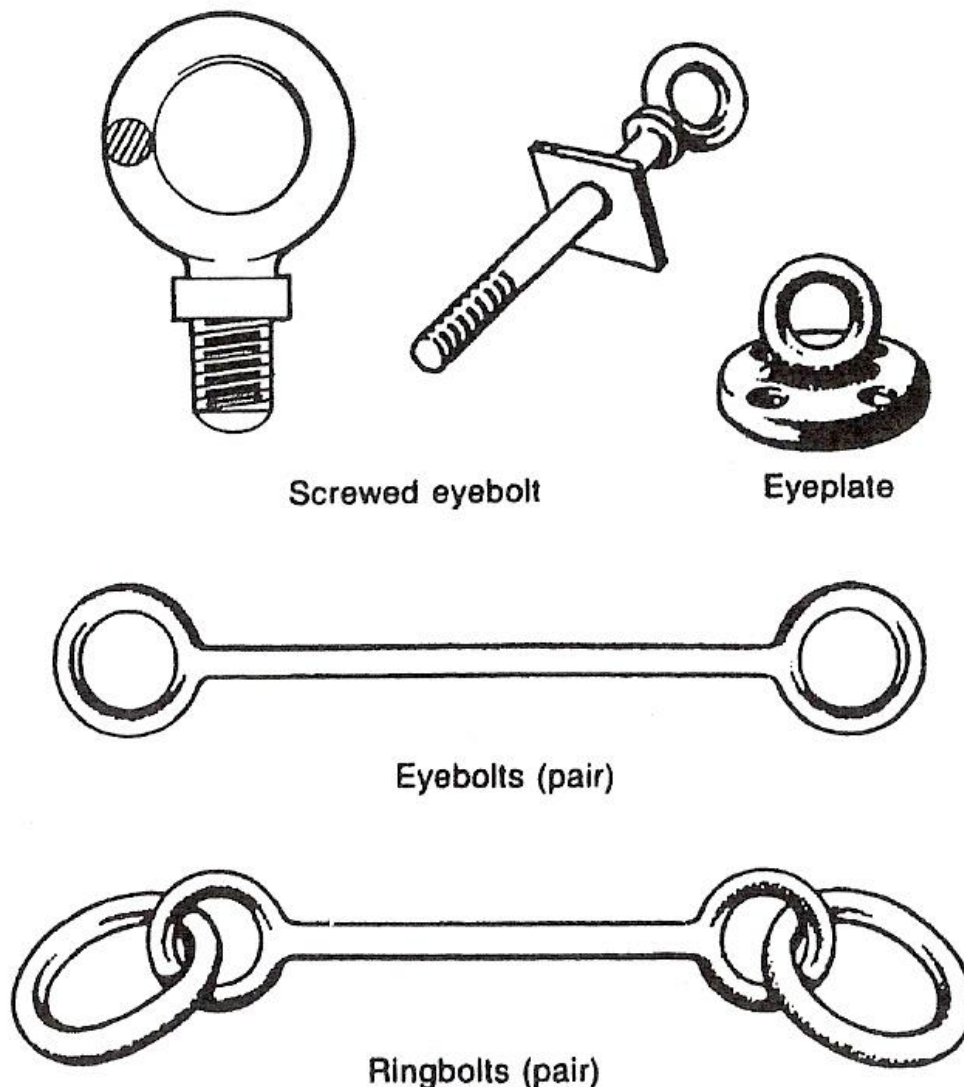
Lifting Tackle - Eye Bolts, Eye Plates and Ring Bolts
